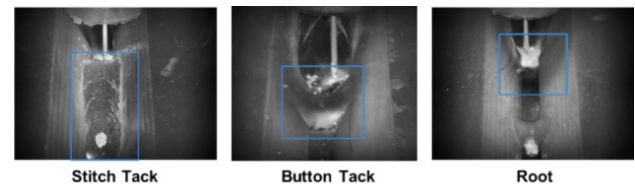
Adapting robotic welding to tack detection and fusion
